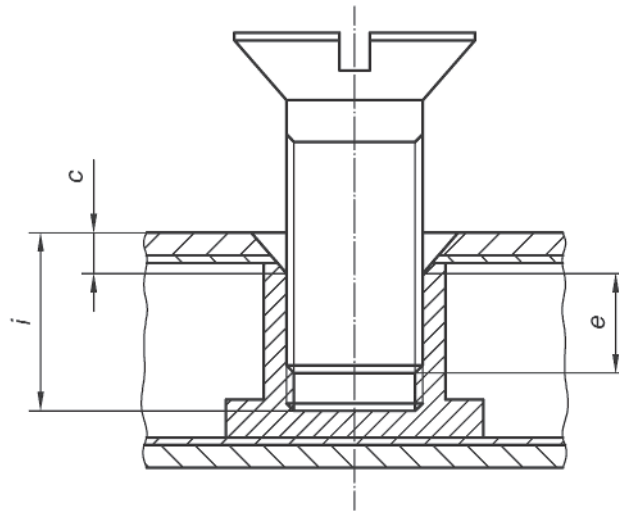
Illustration of screw thread engagement, insert well depth and countersink depth
